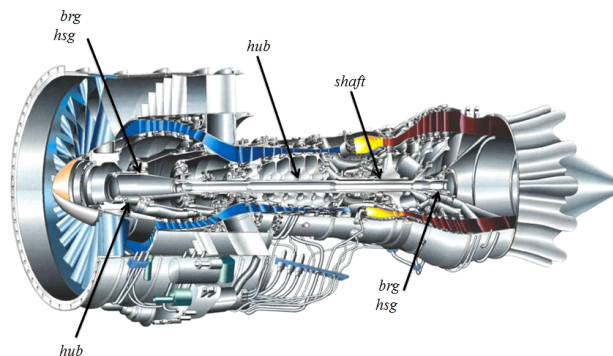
Schematic of a gas turbine engine using HVOF-sprayed components
